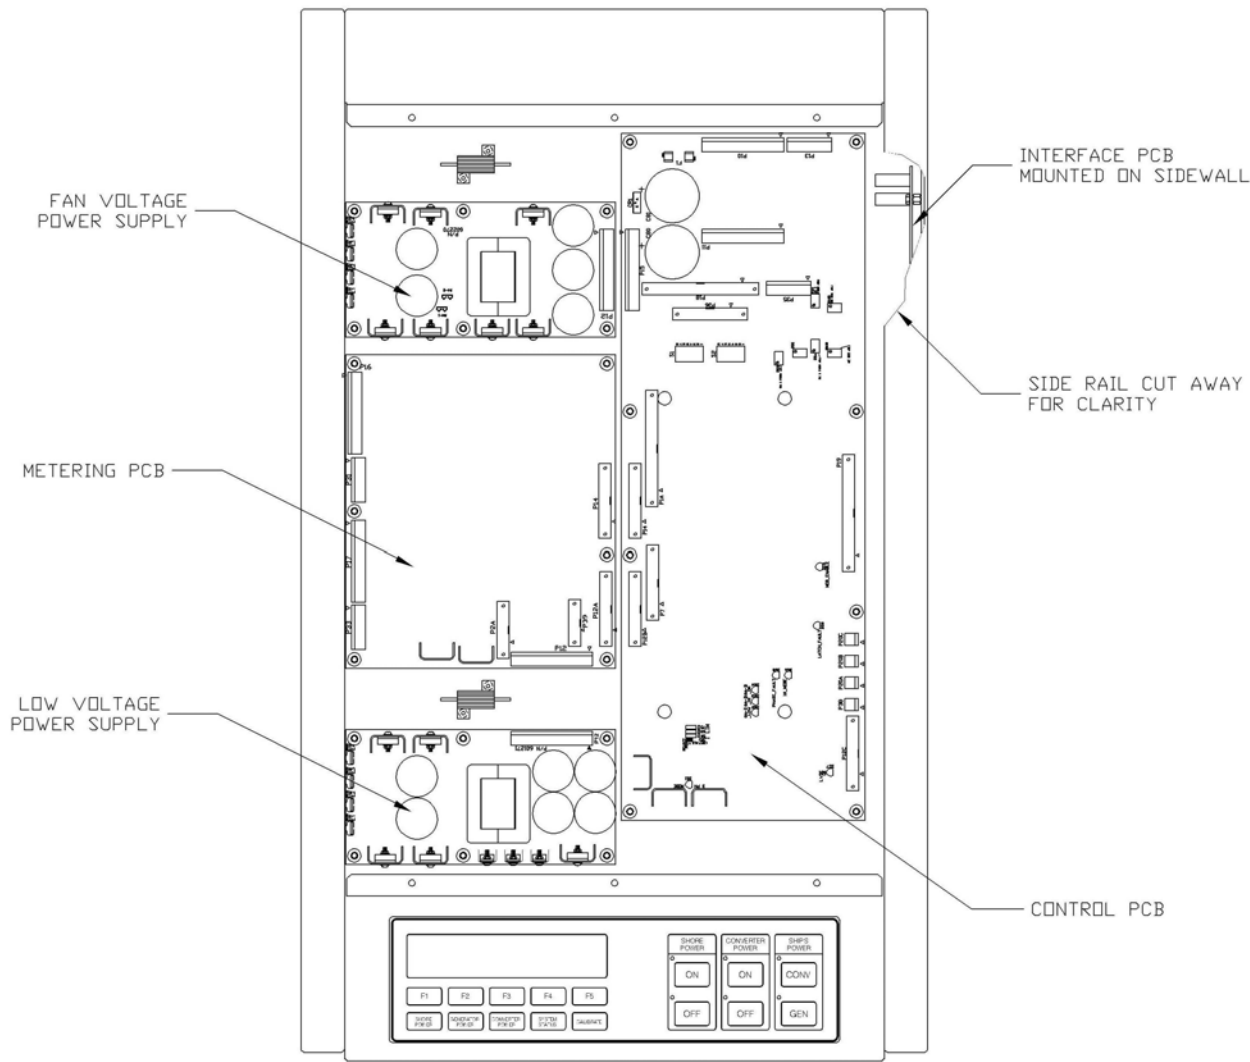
C MECHANICAL OUTLINE, CONTROL BOARD ARRANGEMENT
